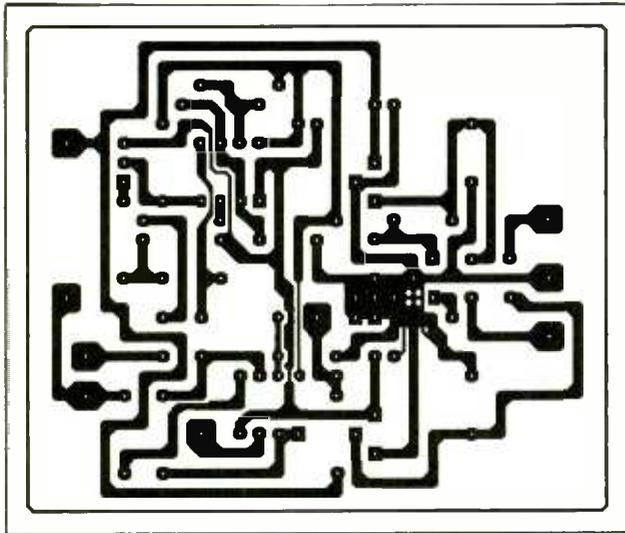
Actual-size etching-and-drilling guide to use when fabricating your own printed-circuit board.
